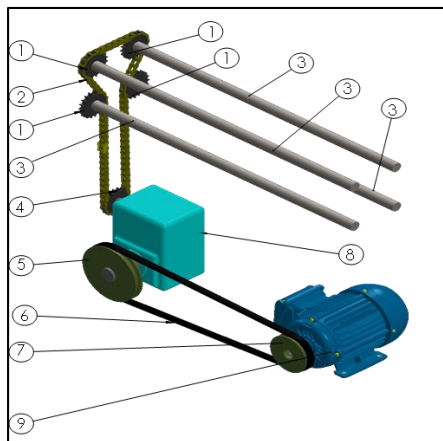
Schematic representation of the power transmission system of the power-operated linseed fiber extraction machine (POLFEM), showing the arrangement of motor (9), speed reduction gearbox (8), driver pulley (7), V-belt (6), follower pulley (5), driver gear (4), shaft gear/follower (1), chain (2), and roller shafts (3). All dimensions are in millimetres.
